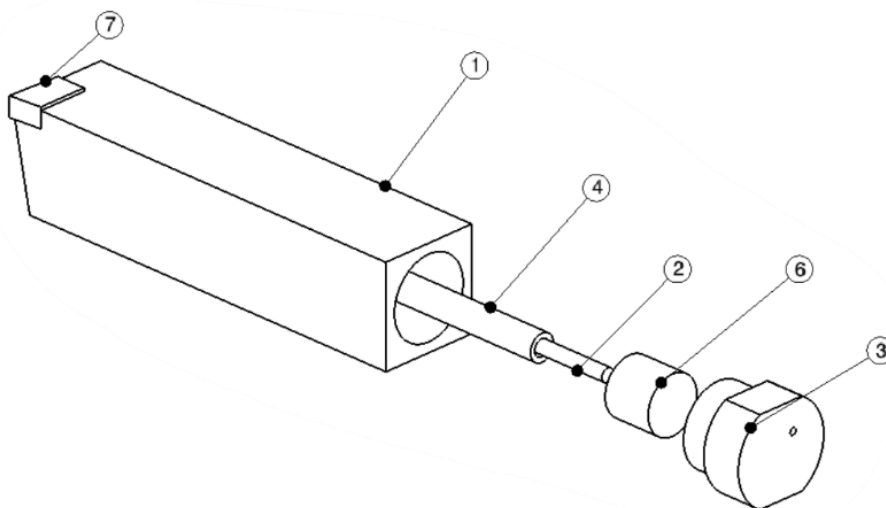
Parts label of the tool holder (1) outer tool body (2) slender bar (3) end cap (4) copper coil (5) fluid volume inside tool body (6) suspended mass (7) Insert
